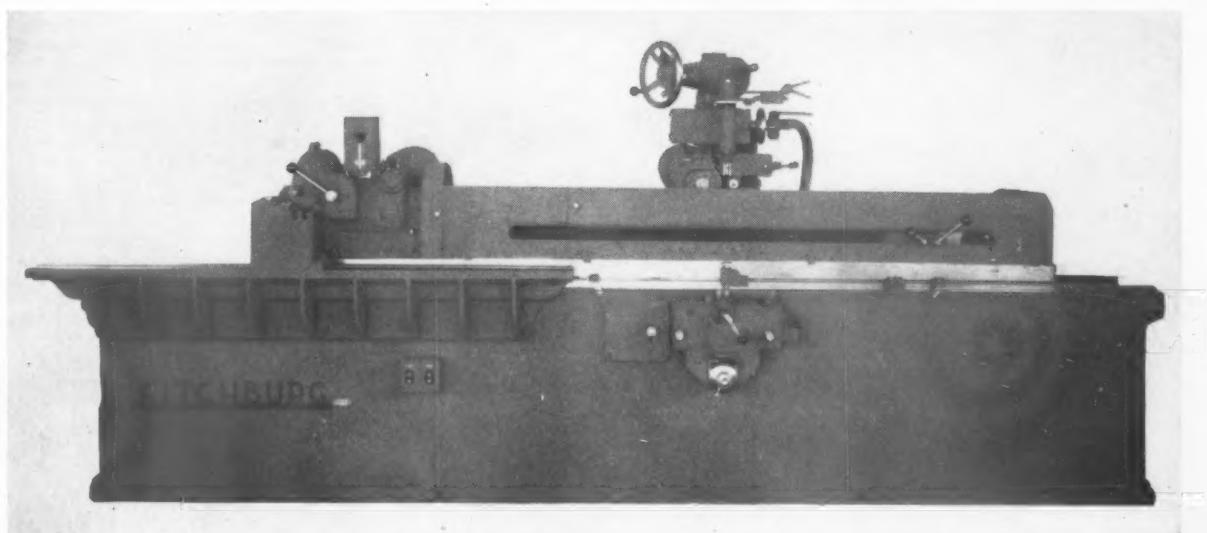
60" spline shaft grinder with Vickers hydraulic control.
